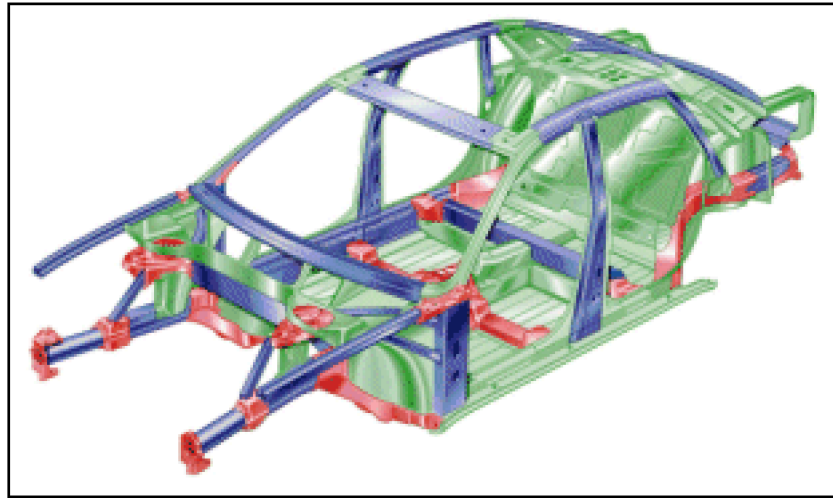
The space frame construction of an aluminium chassis. Sheet material (green) and extrusions (blue) are welded to cast nodes (red).
